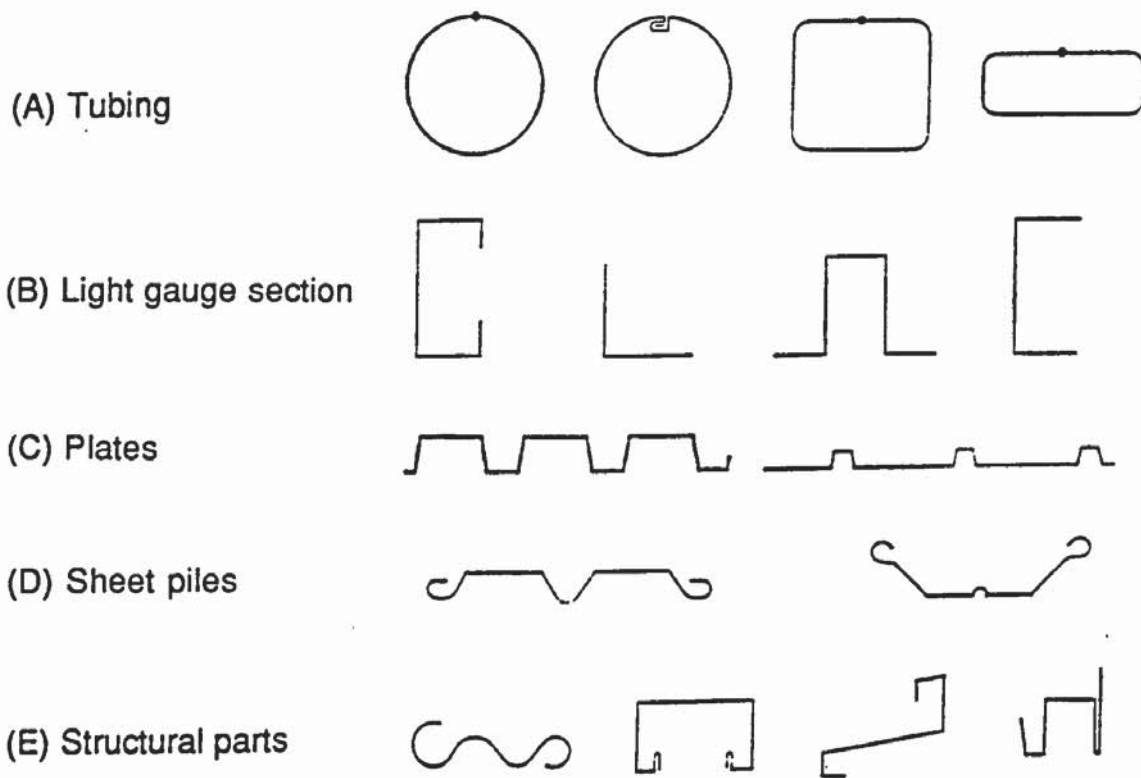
Typical shapes of sections produced by the cold roll-forming process
